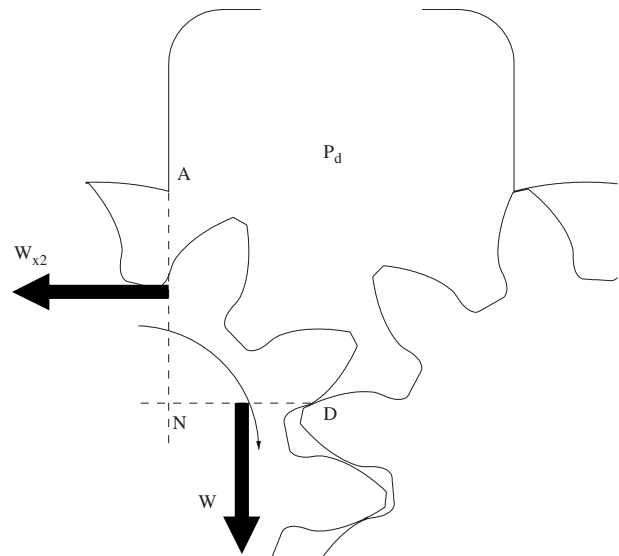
Calculation of the load on the driving gear due to the pressure in the discharge
